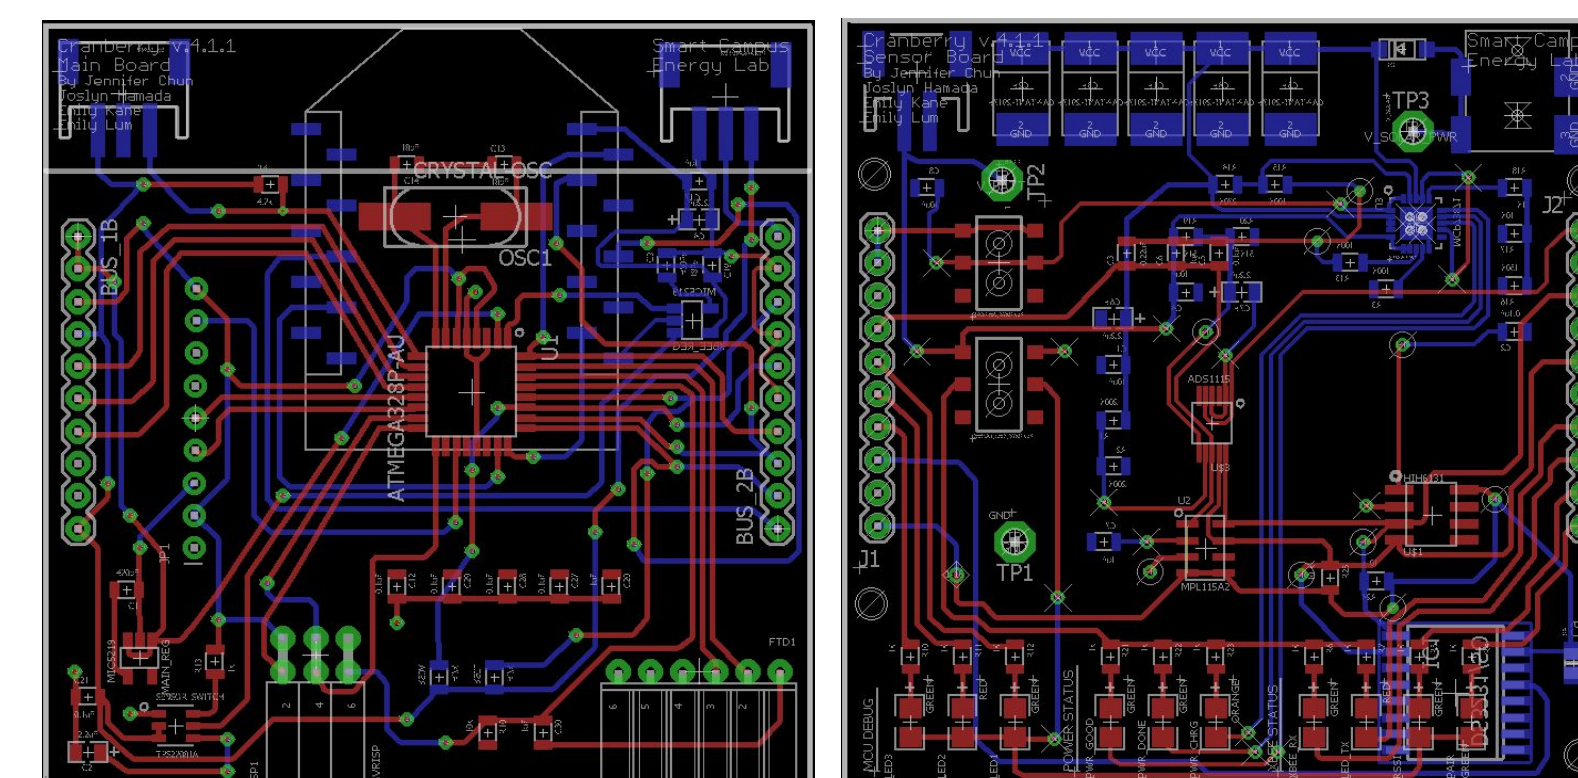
Cranberry v4.1 PCB (2.375" by 2.375")
